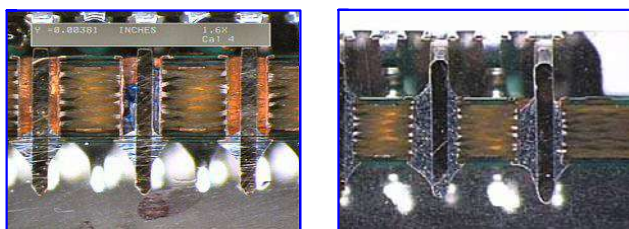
Unacceptable wave solder hole fill (L) and acceptable hole fill (R)
